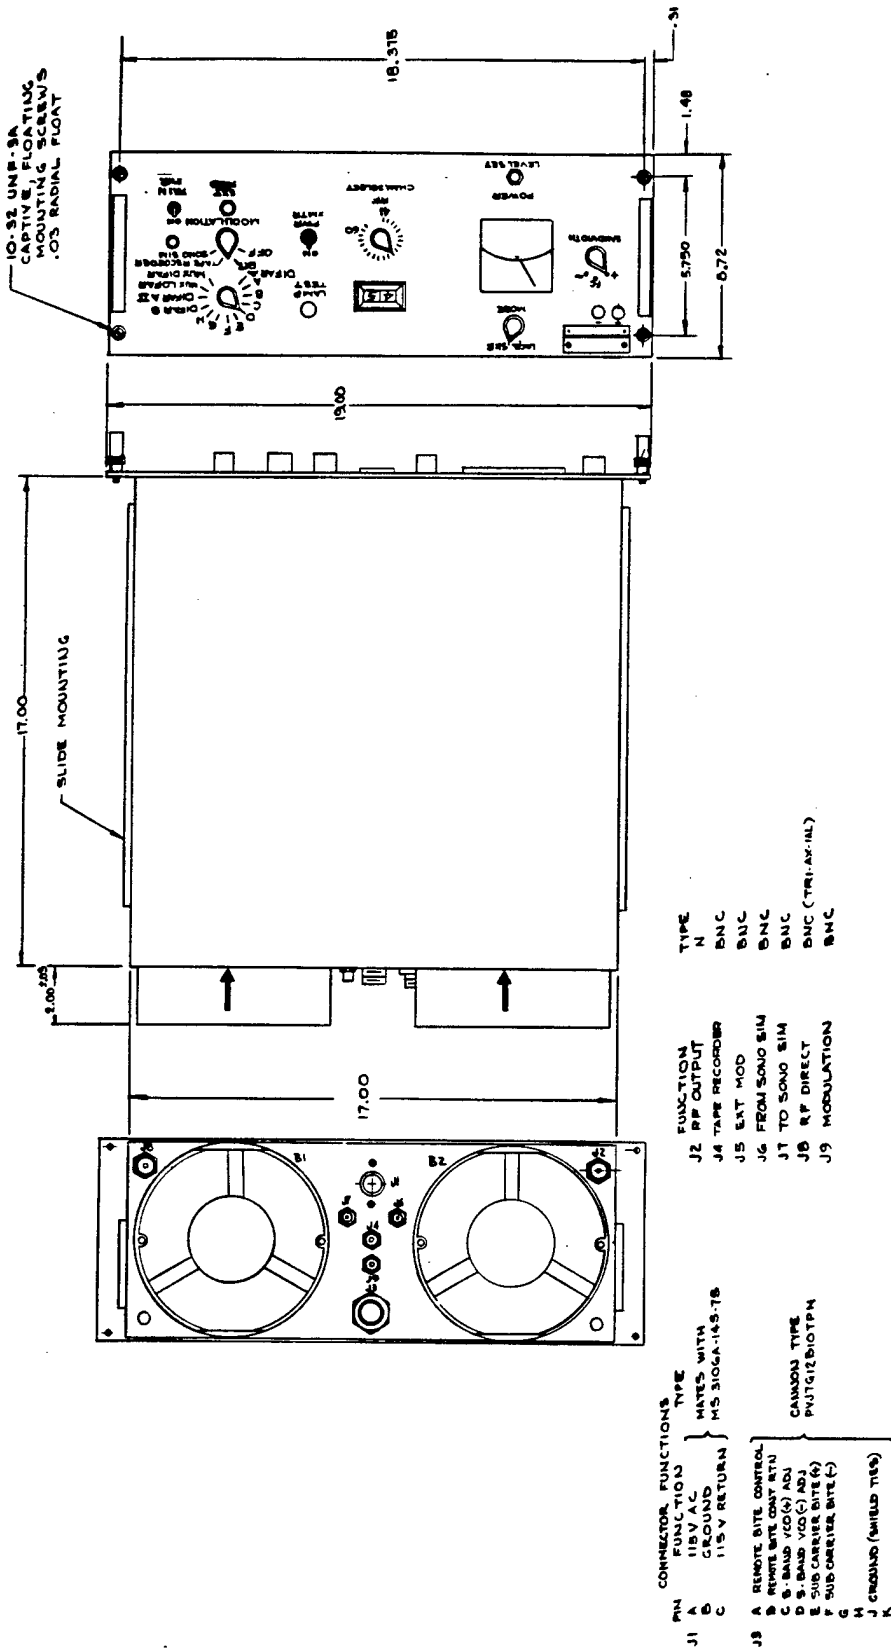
Test Set, TS-3683A/SKR-6, Outline Drawing
